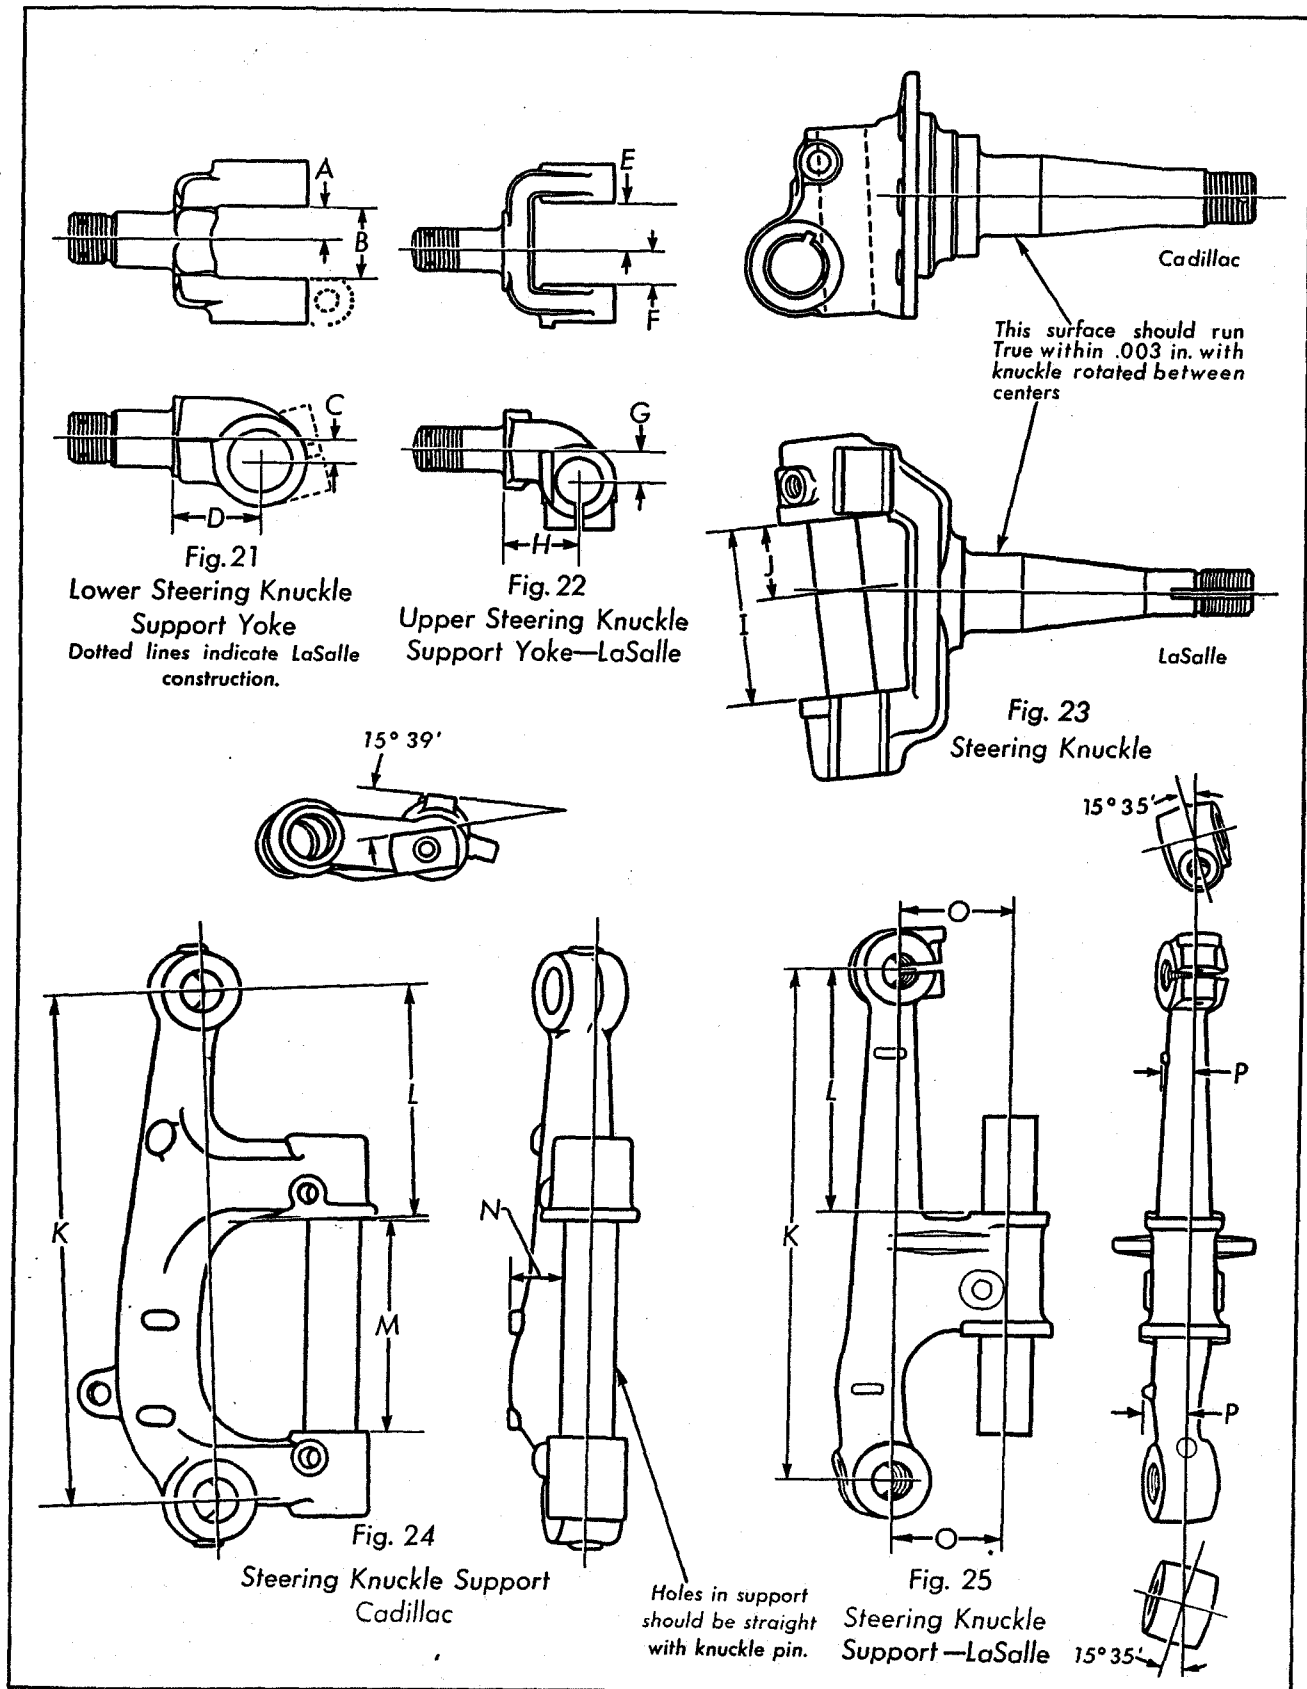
Alignment of Front Wheel Suspension and Steering System Parts (Part 2)
